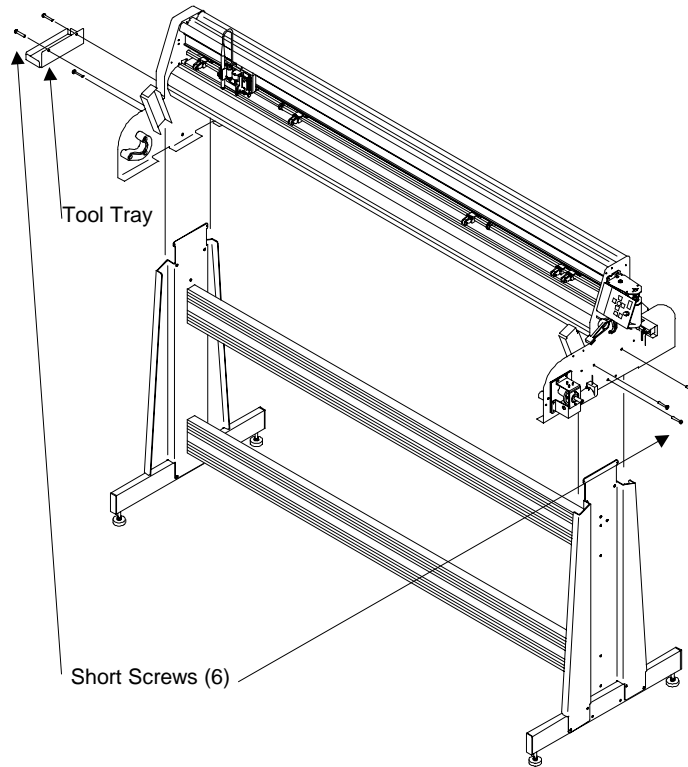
Attaching the Plotter and the Tool Tray to the Stand
